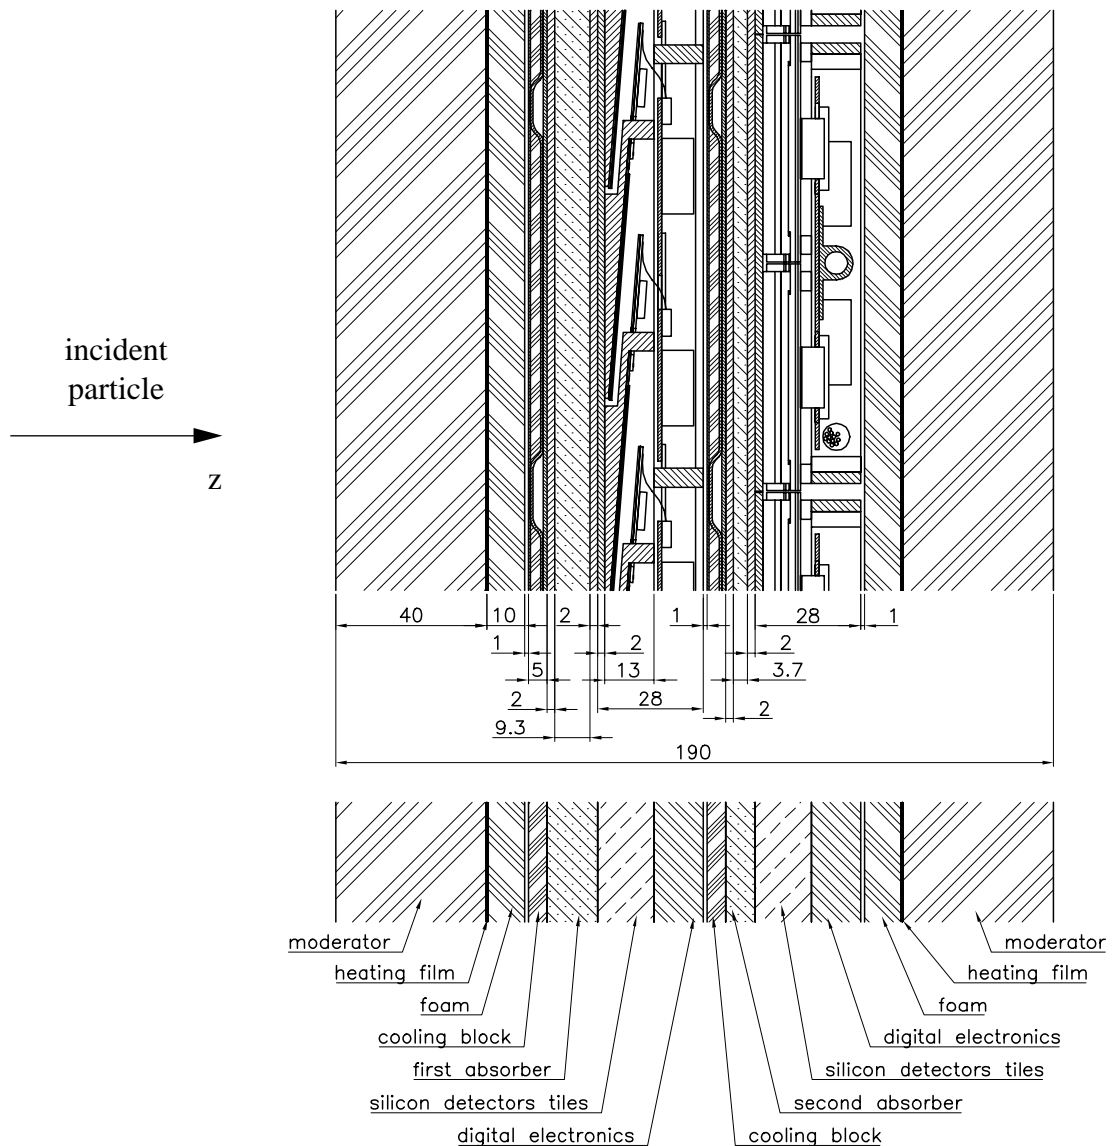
Endcap preshower cross-section: schematic view (bottom) and mechanical design (top). All dimensions are in millimetres.
